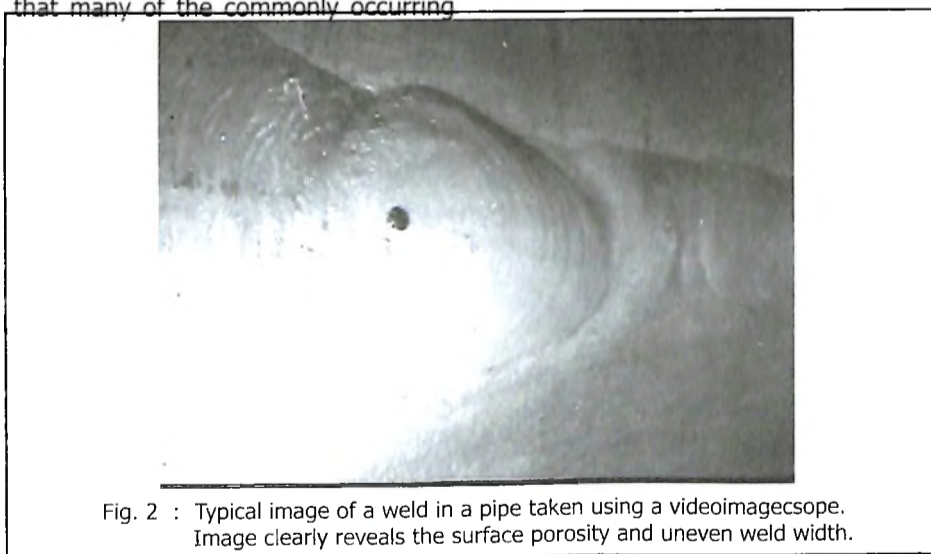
Typical image of a weld in a pipe taken using a videoimageoscope. Image clearly reveals the surface porosity and uneven weld width.
